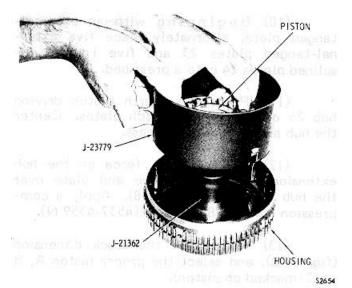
Installing forward clutch housing piston, using sealring protector tool
